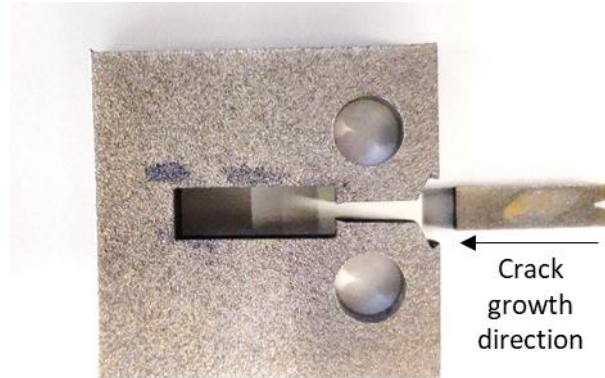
An image of an FCGR interrupted test specimen, with the crack growth section wire-cut for sample preparation
